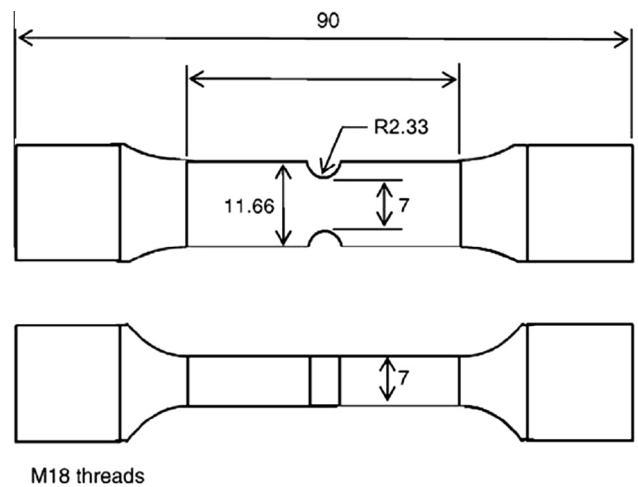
Double edge notch specimen geometry (dimensions in mm).
